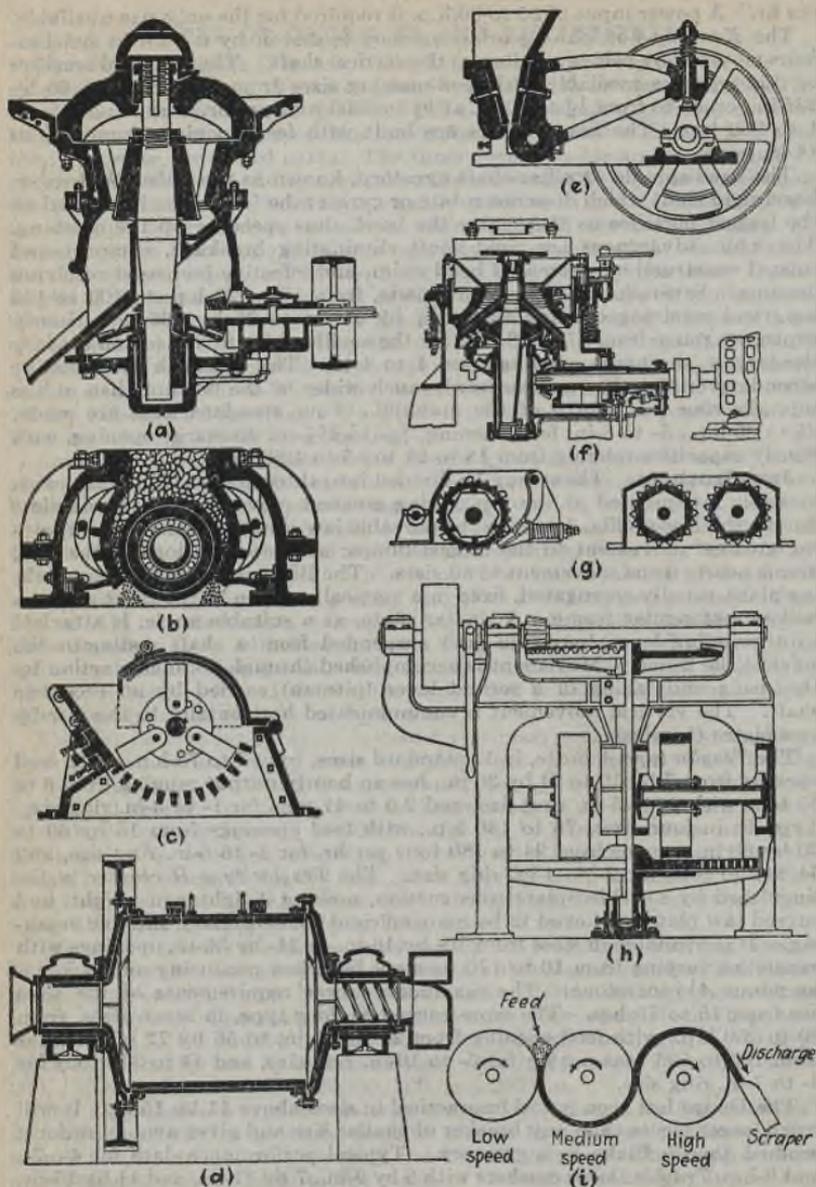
(a) Gyrotory crusher; (b) gyrocentric crusher; (c) swing-hammer pulverizer; (d) ball mill; (e) jaw crusher; (f) cone crusher; (g) roll crusher; (h) pan or chaser mill; (i) roller mill. (Badger and McCabe, "Elements of Chemical Engineering.")
